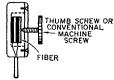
Sketch showing modification of FT-243 crystal holder to provide adjustment of compression.
